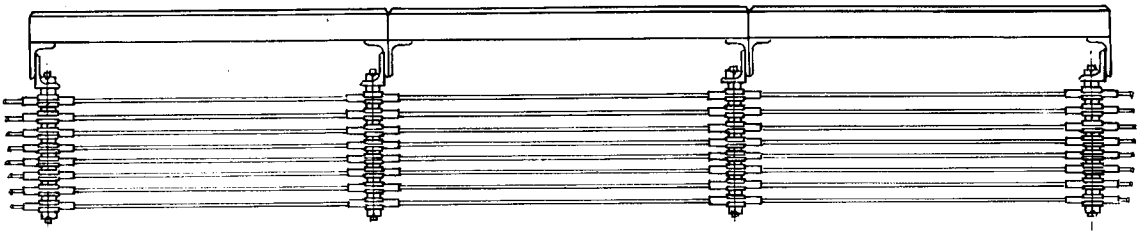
Plan View of Instrument and Control Bus Mounted on Slate Panel with Angle Iron Frame.
